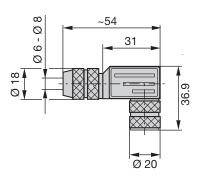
Connector BKS-S104-00 (socket) for BUS IN
